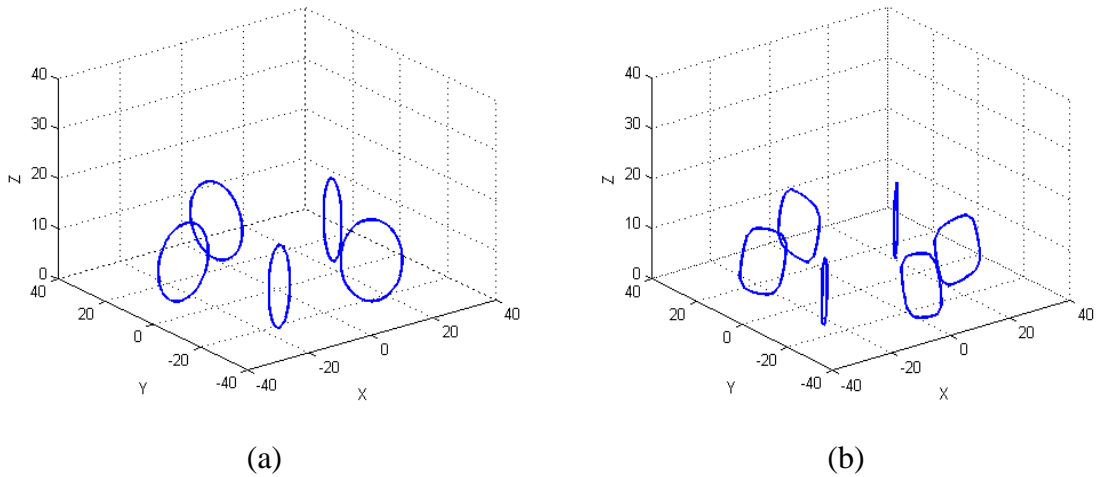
Two example inserted face milling tools with circular [Tool 1 - (a)] and curved squared [Tool 2 - (b)] insert geometries
